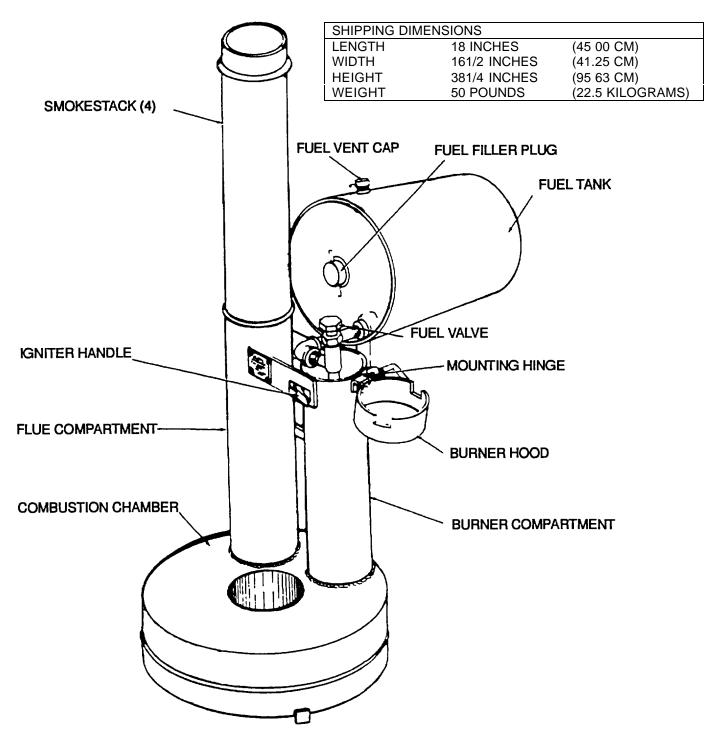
Immersion Heater, Three-Quarter View with Shipping Dimensions
